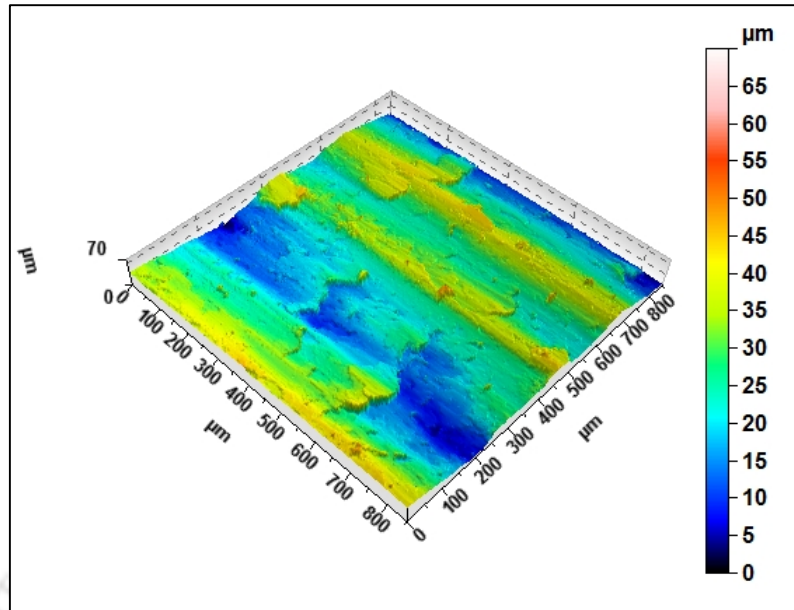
(b) Machined surface made by WC-Co (80 m/min) under non contact three dimensional profilometer
